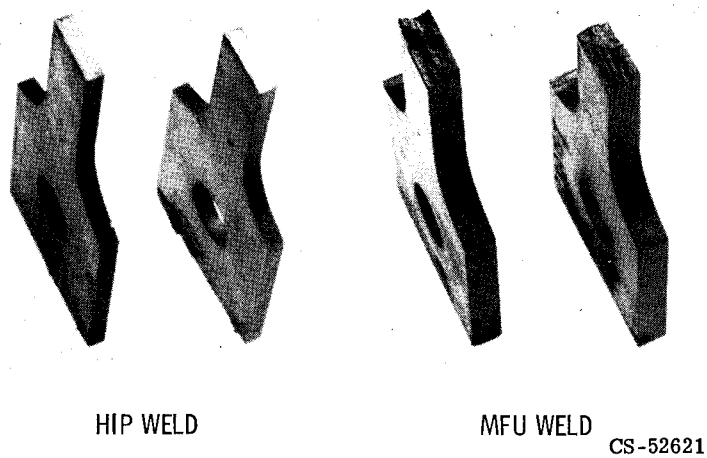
Fracture at hot isostatic pressure (HIP) and magnetic force upset (MFU) weld joints in thoriated-nickel sheet in 2000° F tensile tests.
